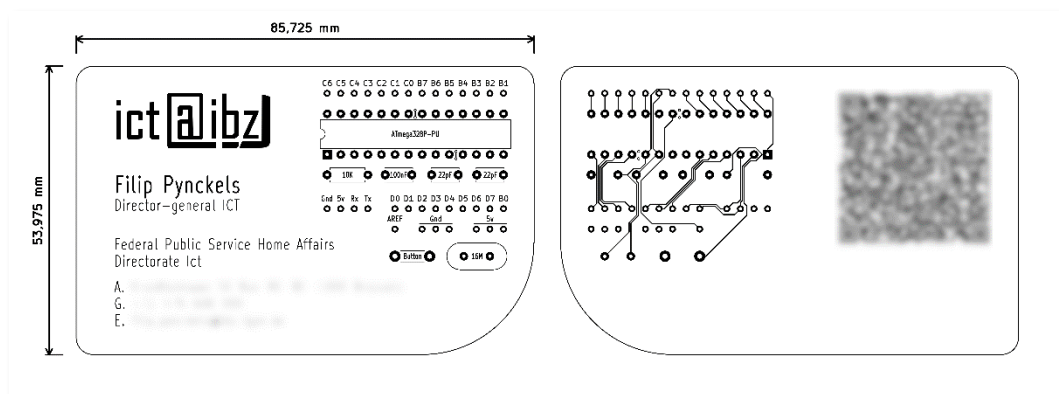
PRINTED CIRCUIT BOARD (PCB)
